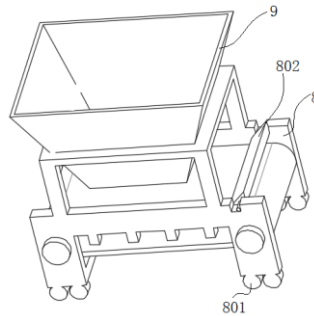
is the assembly drawing of the small belt conveyor and weighing hopper.
